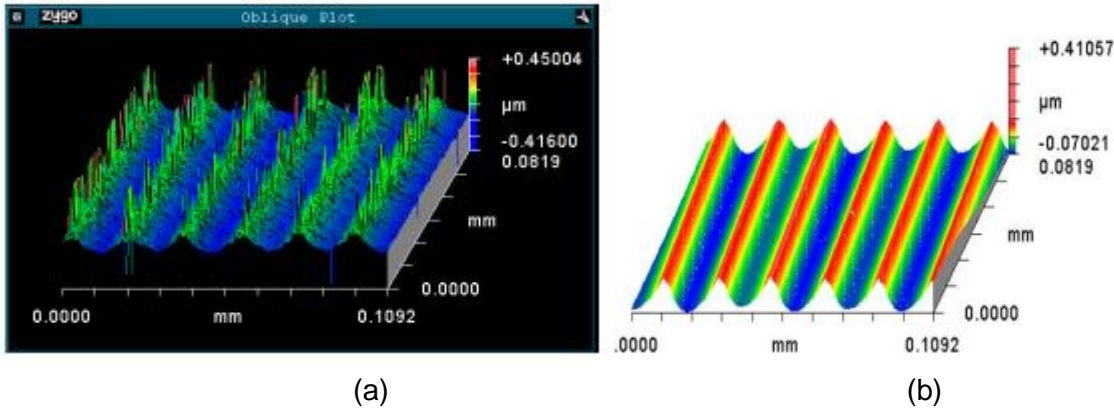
Machined PC surface (a) without chip management (b) with chip management system
